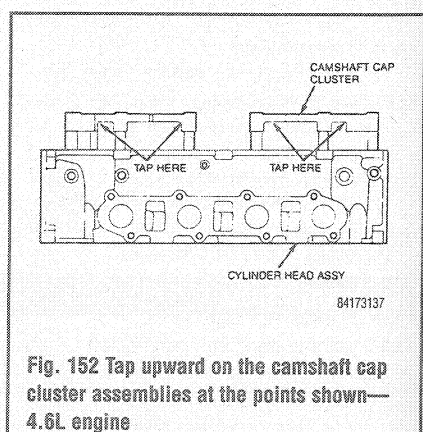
Tap upward on the camshaft cap cluster assemblies at the points shown—4.6L engine
